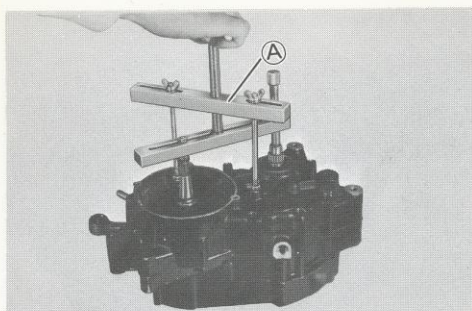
Detach crankcase, using special tool (A) (09910-80113).
